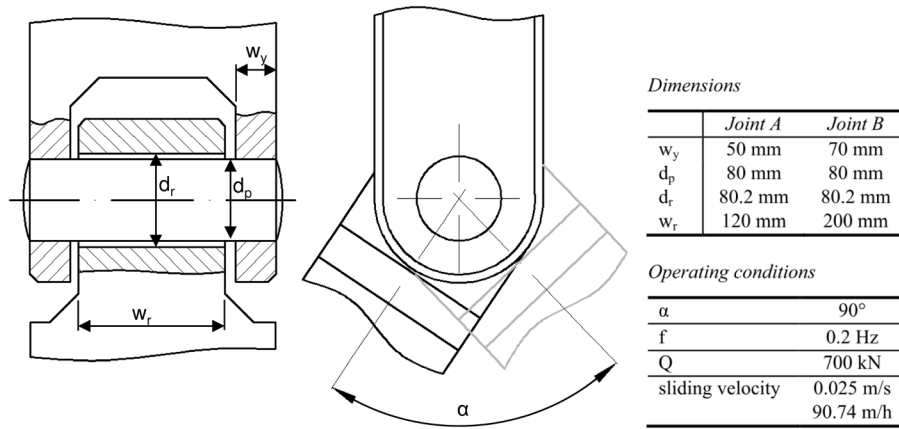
Layout, dimensions, and operating conditions of the investigated joints
